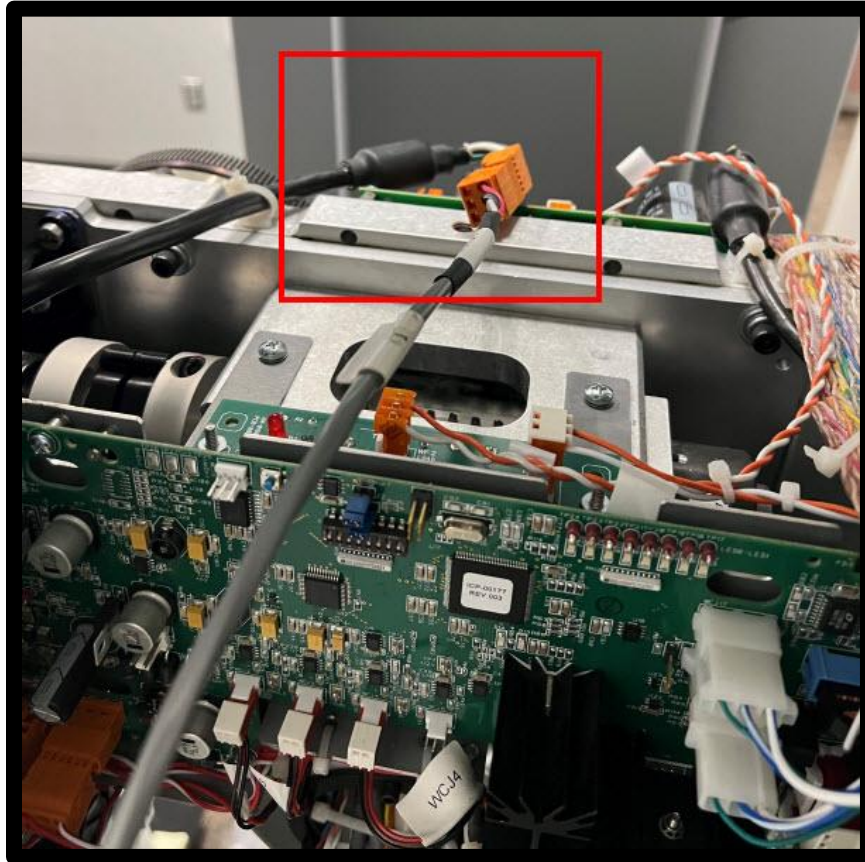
Connecting TLS-01064 Power Supply to Rotation Motor
